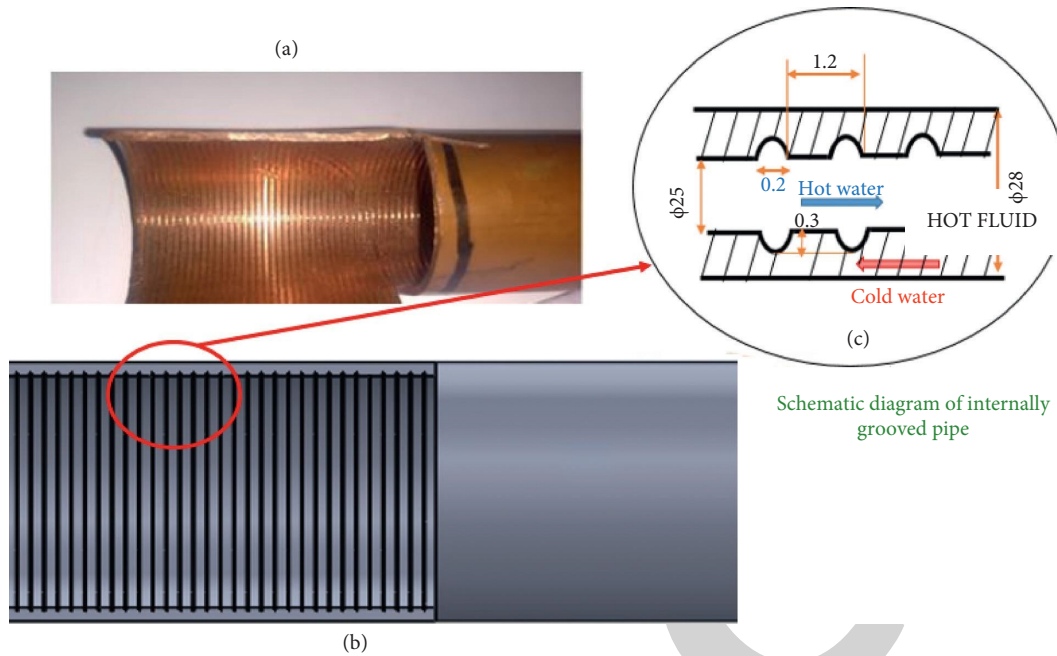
Cut section of internally grooved test section: (a) grooved copper pipe, (b) 3D model of grooved pipe, (c) schematic of groove.
